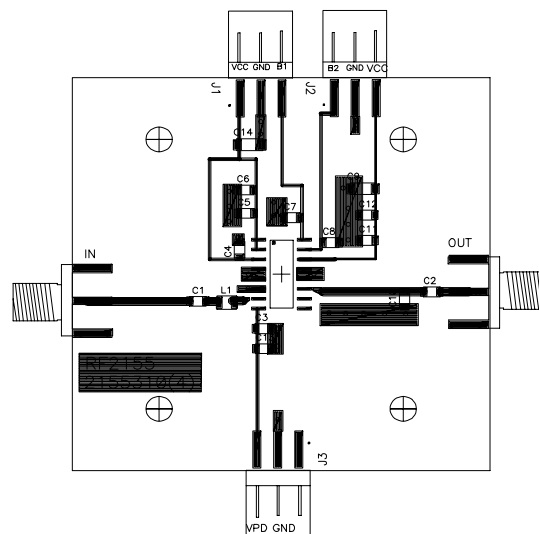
RF2155 Printed Circuit Board; Board Material: FR-4, h=30 mils.
